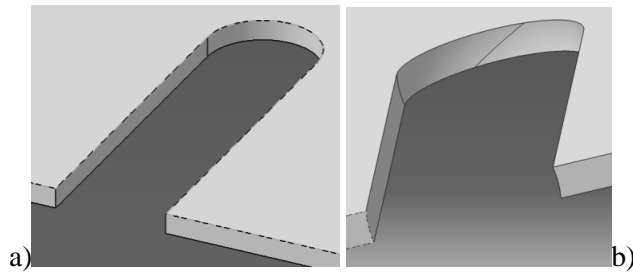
a) view of the straight groove with the flat-plate surface, b) view of the straight groove with a spherical surface for the third design model
